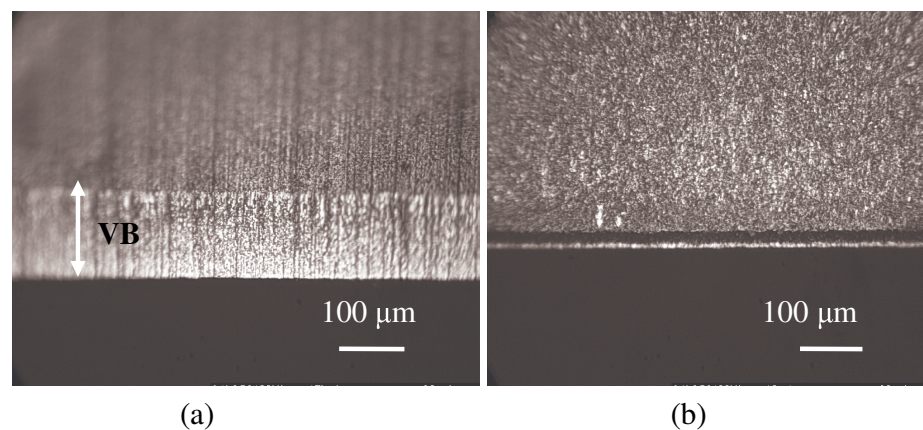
(a) Flank and (b) Crater wear of the PCBN tool before cutting tests.
